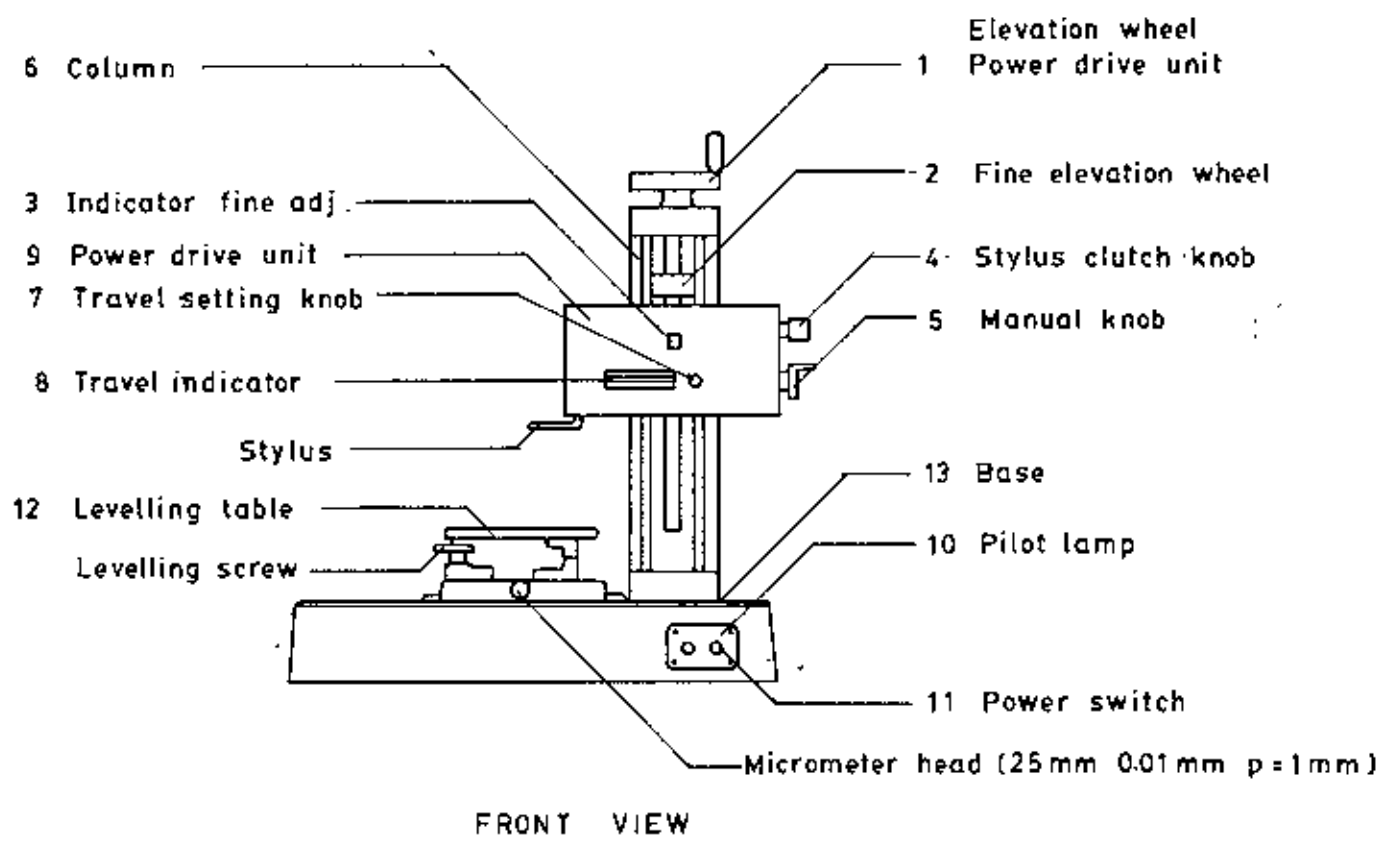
Surface roughness measuring equipment (surf. test AB-5 machine)
